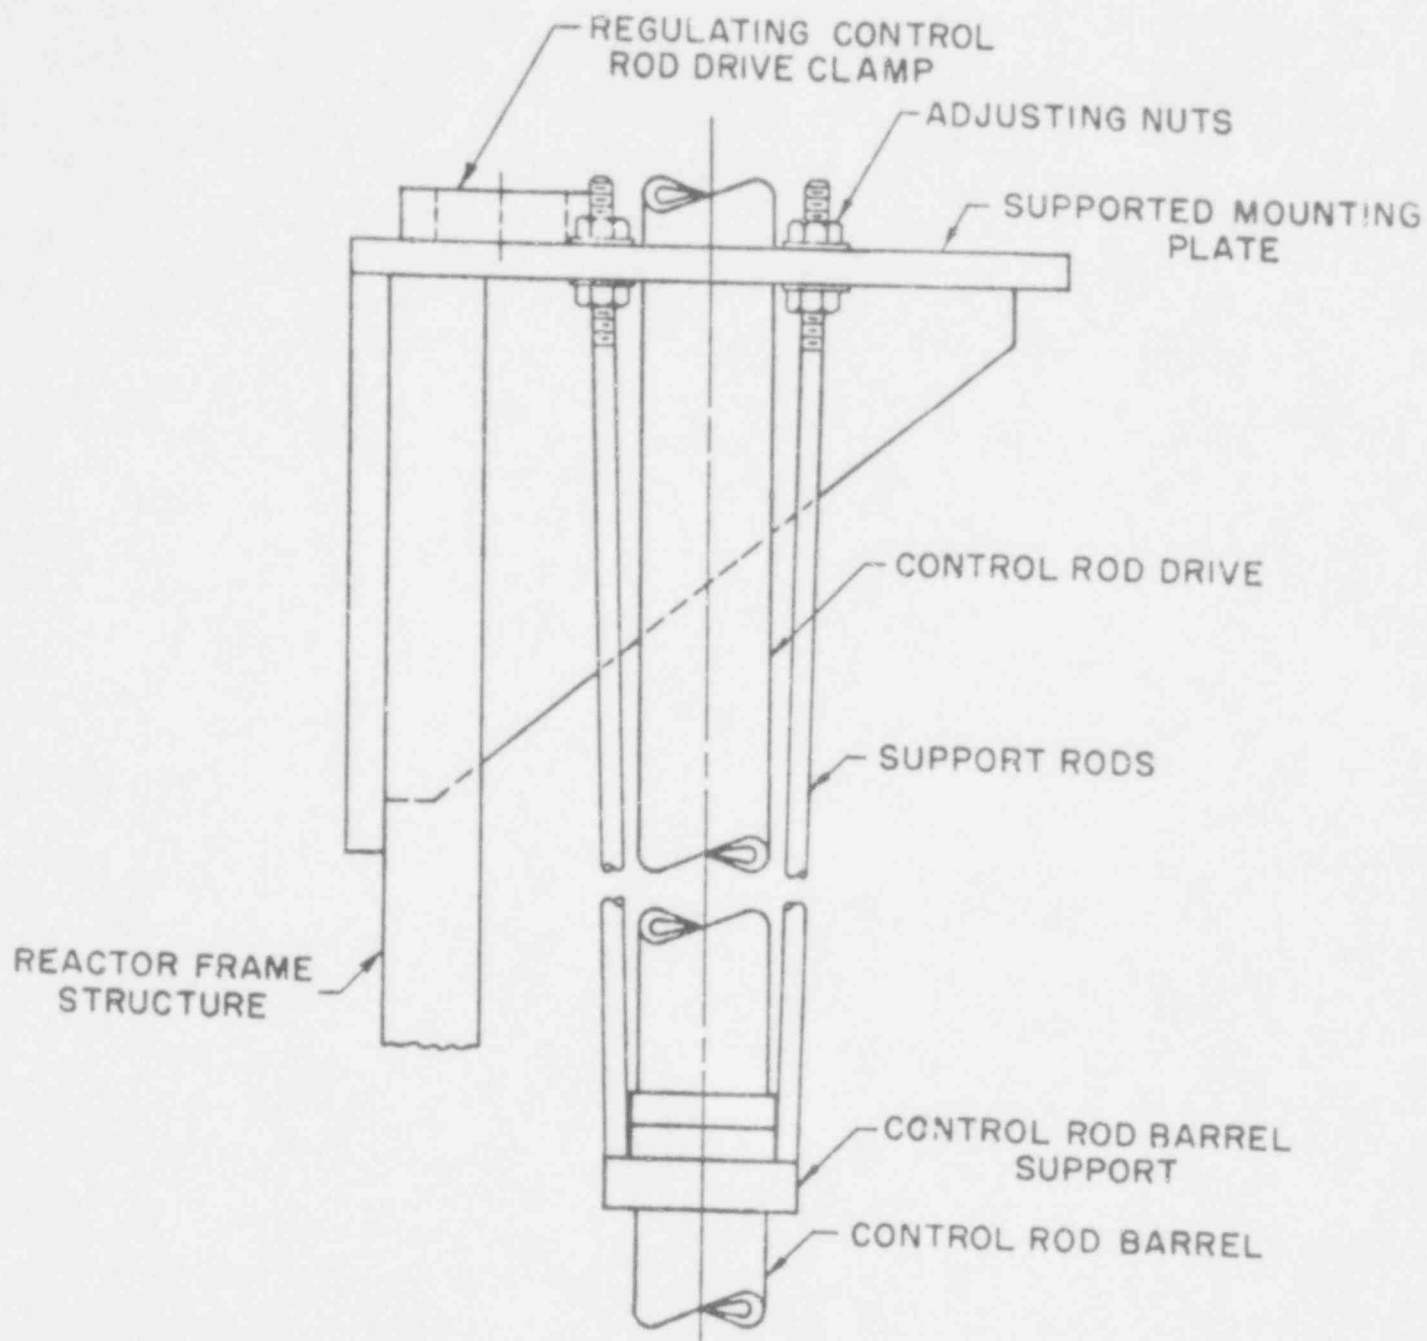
CONTROL ROD ASSEMBLY SUPPORT MECHANISM
